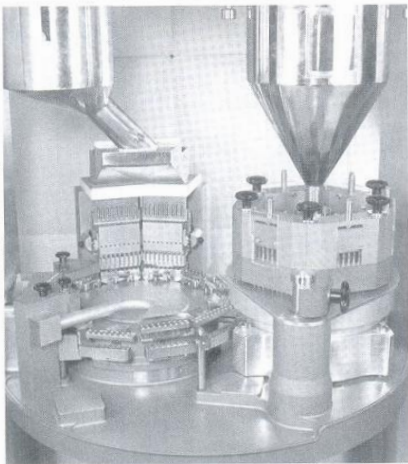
View into the GKF 2500S capsule-filling machine. Capsules are fed from a hopper into the rectification system (left) and opened. Powder plugs are formed in the tamping unit (right) and transferred into the lower segments, which follow a circular path for opening, filling and closing (front). (Reproduced from Bosch Customer Leaflet VT/VFW 04/02-1E, with permission of Robert Bosch GmbH, Germany.)
